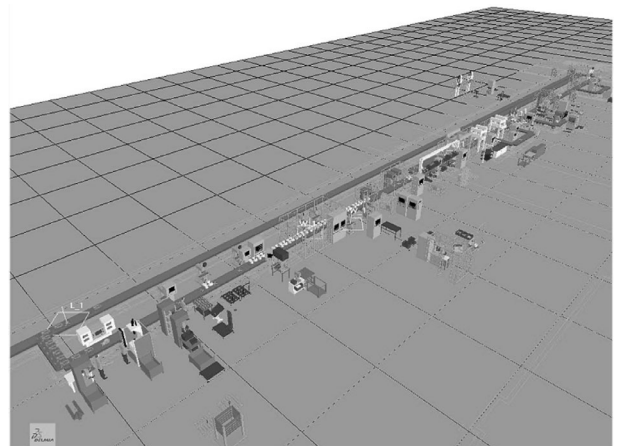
VW Slovakia – FMU of Gearbox Assembly Line [6].
